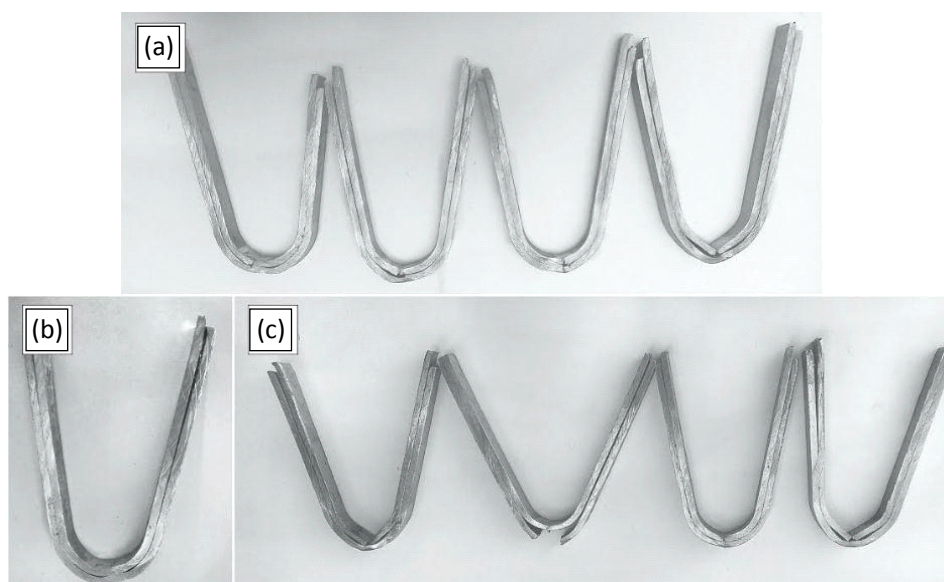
Bend tests with cracks and fractures: (a) specimen 5, (b) specimen 7 and (c) specimen 8
